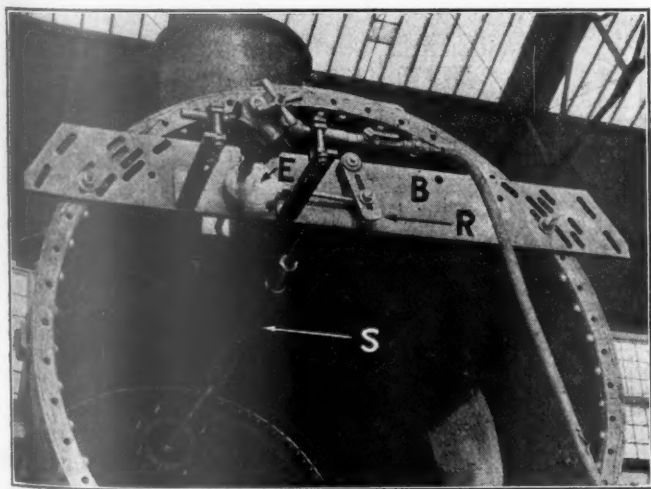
Pneumatic Device for Grinding Dry Pipe Joint in Flue Sheet
